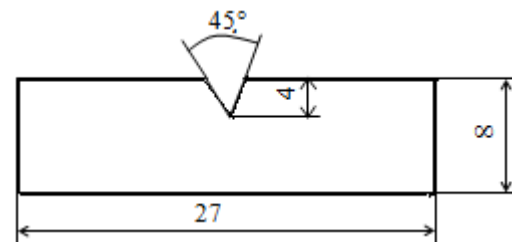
Shape and dimensions of the modified bending test (modified notch toughness test) specimen.
